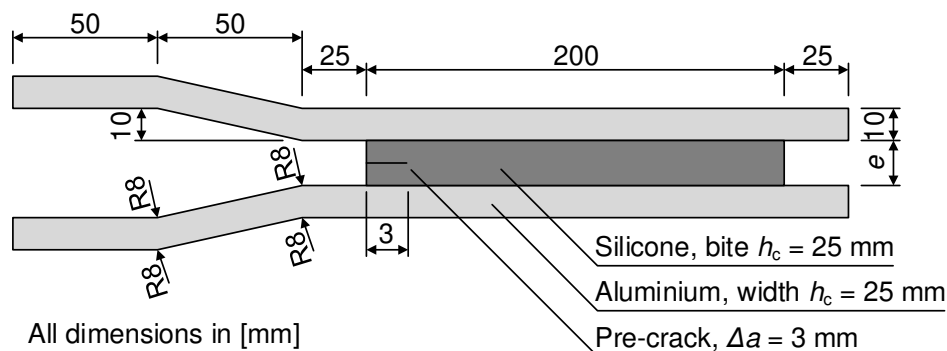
Dimensions of the Double Cantilever Beam specimens (drawing not to scale)
